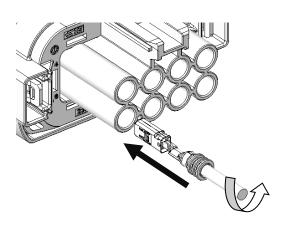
2319021-2 Cover, 8P Mini Fuse and Relay Housing Assembly
